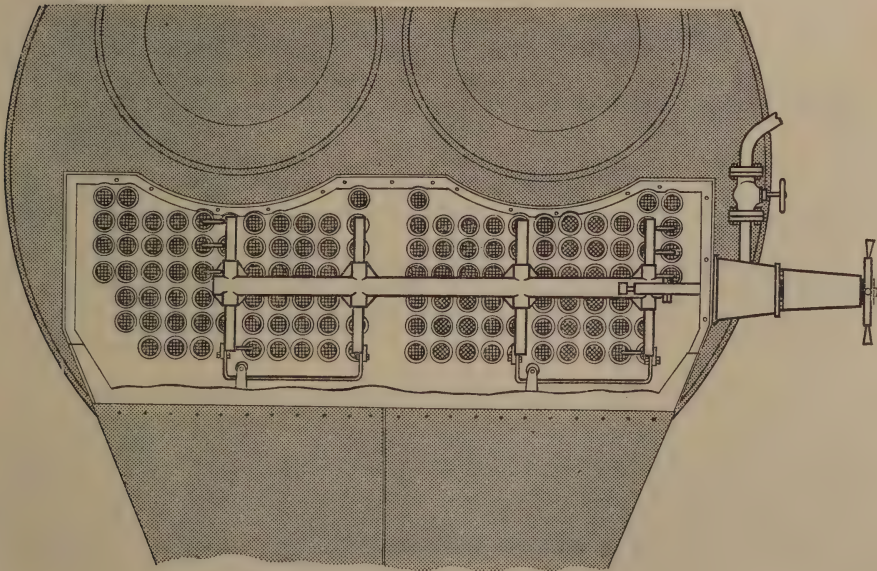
Multi-jet soot-blower in boiler smoke box.
